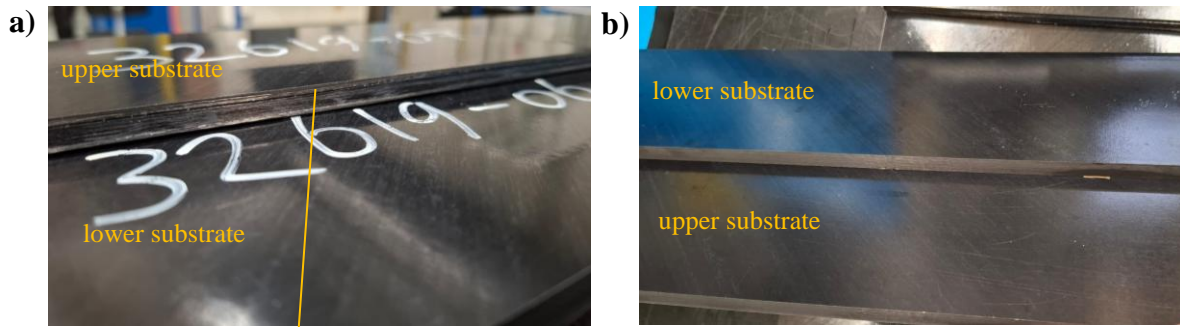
Appearance of welded panel 1. a) Regular orientation, b) welded panel flipped.
